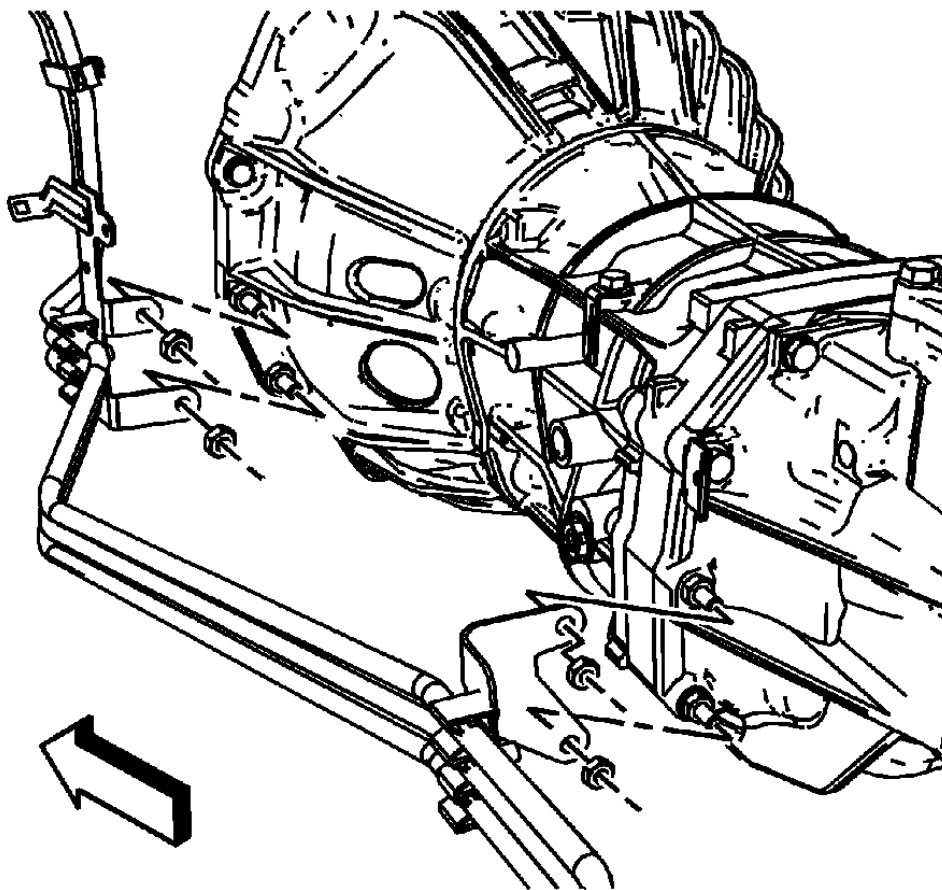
View Of Fuel Hose/Pipe Bracket & Nuts (MA5)
